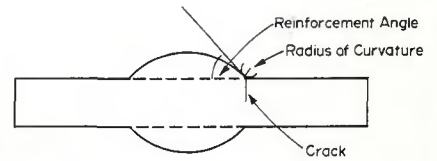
Terminology used in describing the geometry of the weld toe of a welded butt joint specimen
